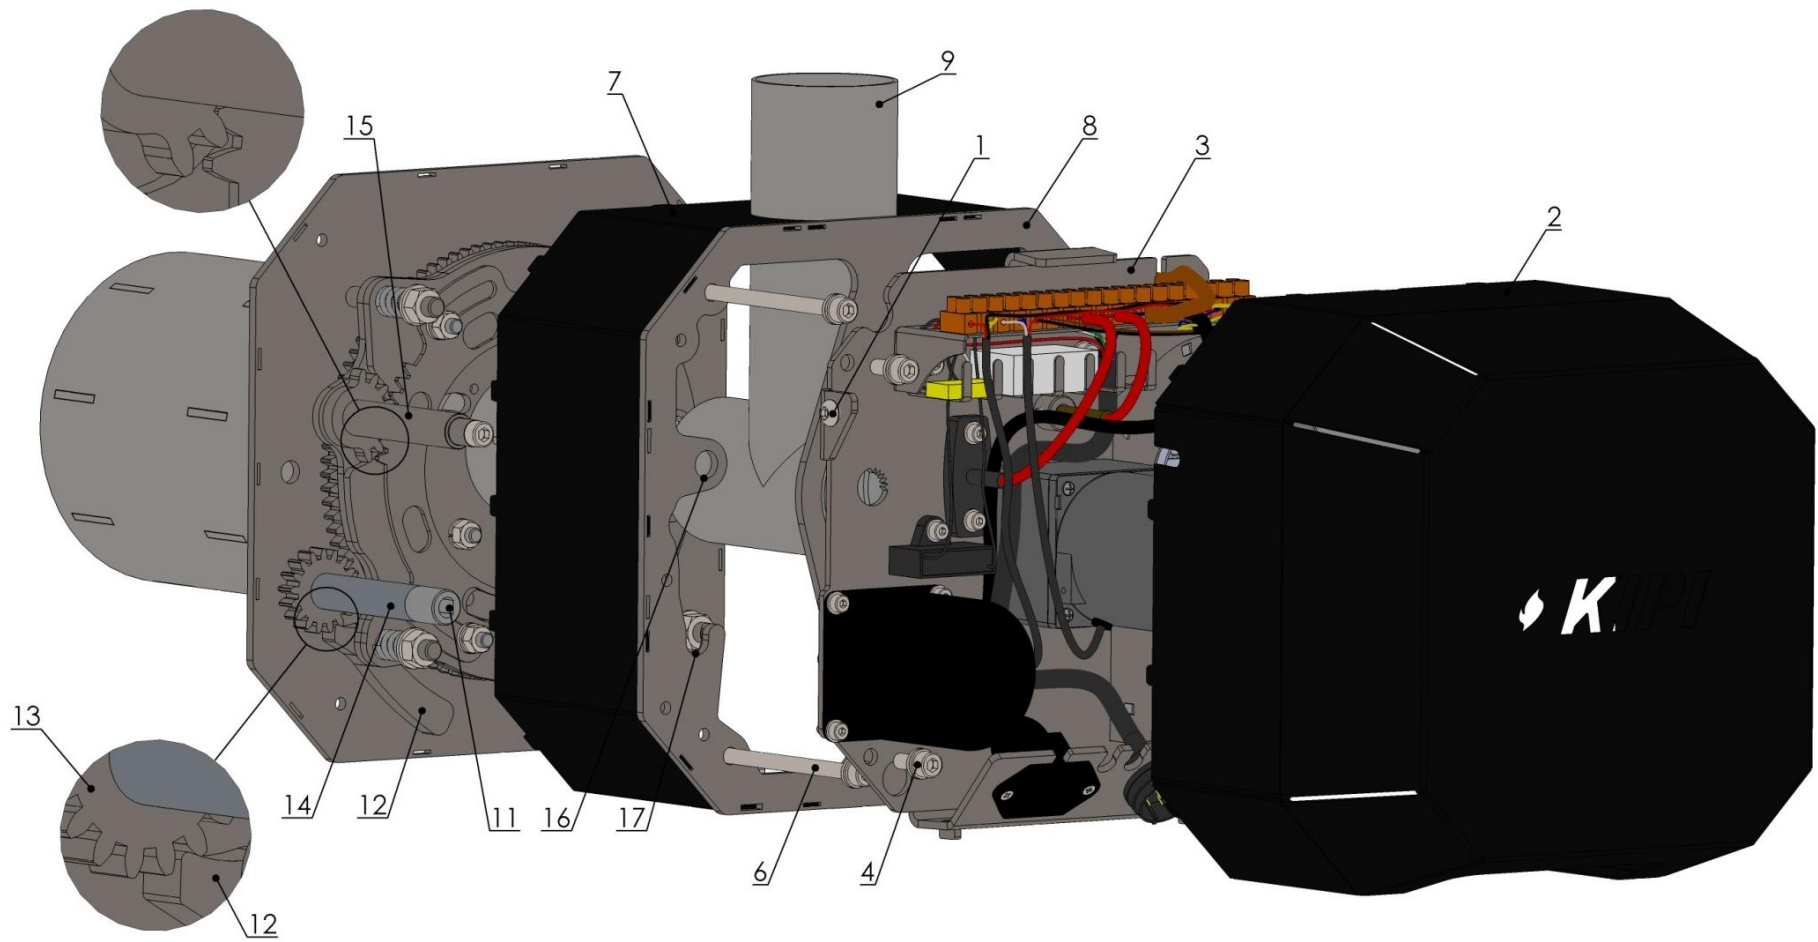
Lubrication of the combustion chamber bearings - view 1.
